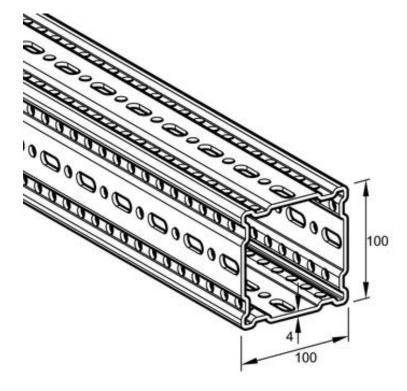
beam profile TP F 100 - used as columns and beams in this project (source: sikla.at)
